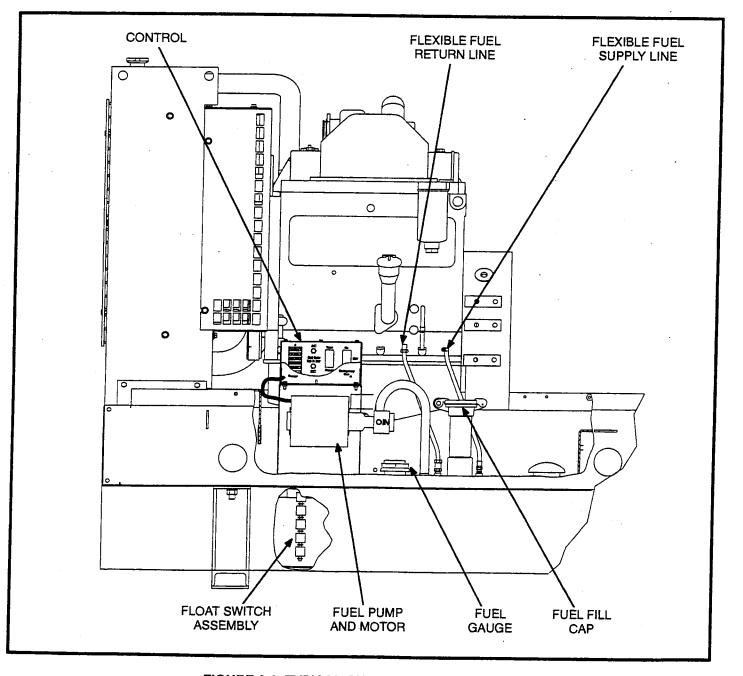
TYPICAL SUB-BASE INSTALLATION
